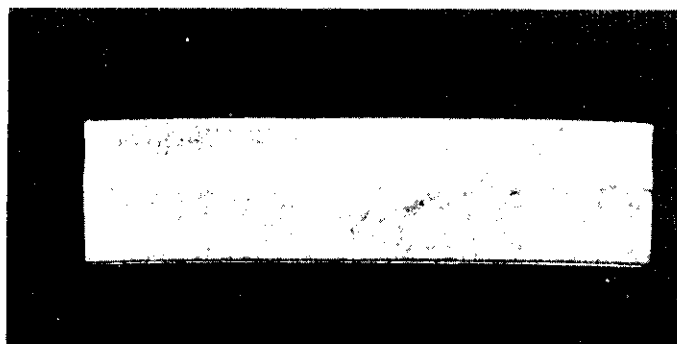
SECTION OF AN ALL-WELD-METAL NOTCHED BEND SPECIMEN HAVING THE ROOT OF THE NOTCH IN THE COARSE COLUMNAR STRUCTURE OF THE AS-DEPOSITED E6010 WELD METAL. COMPARE WITH FIGURE 19.
